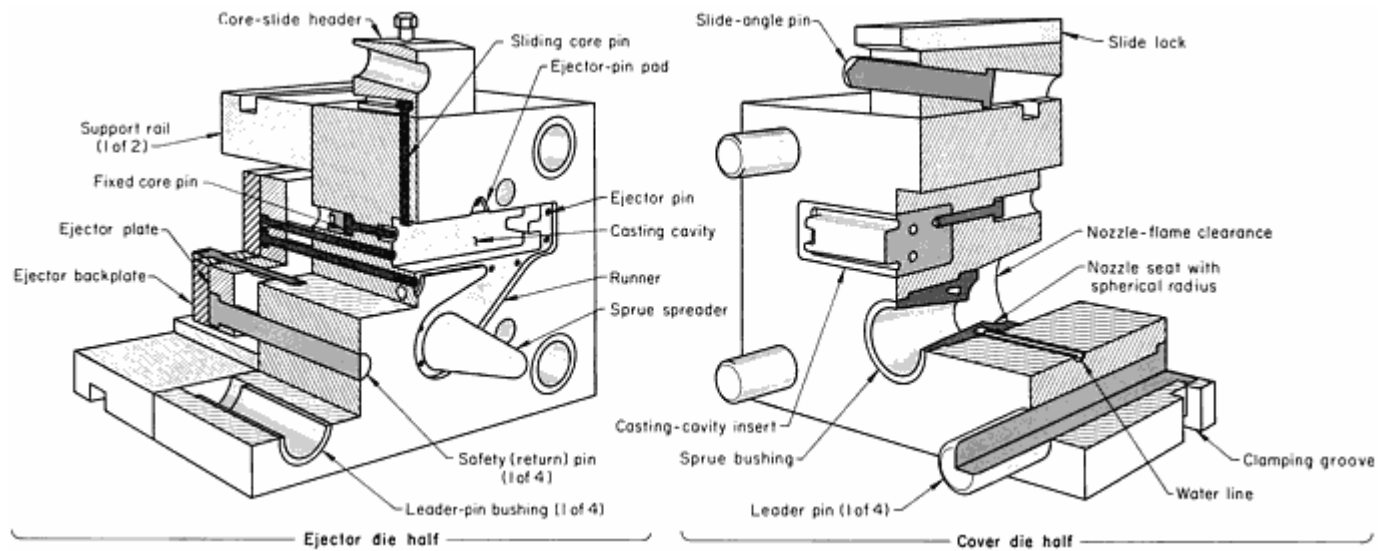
Schematic showing the principal components of a cold chamber die casting machine
